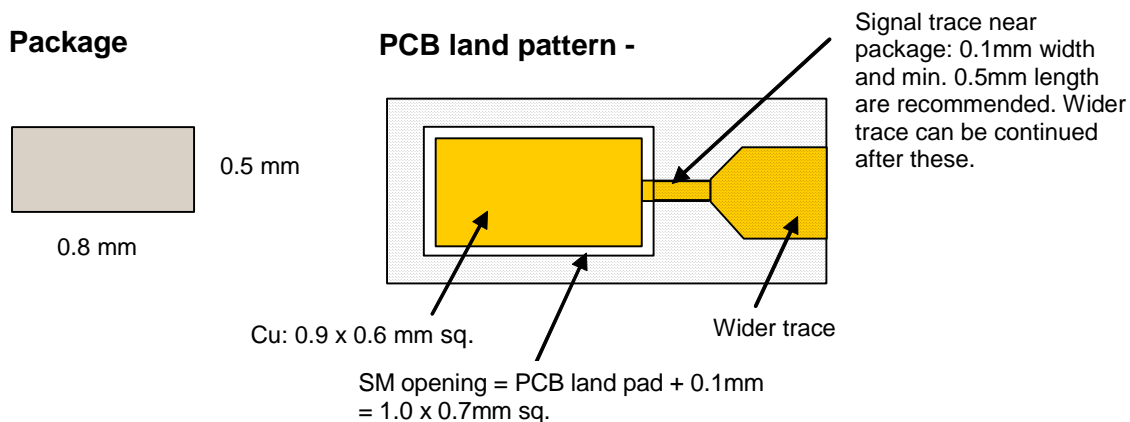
Recommended PCB Land Pad, Solder Mask, and Signal Trace Near Package Design
